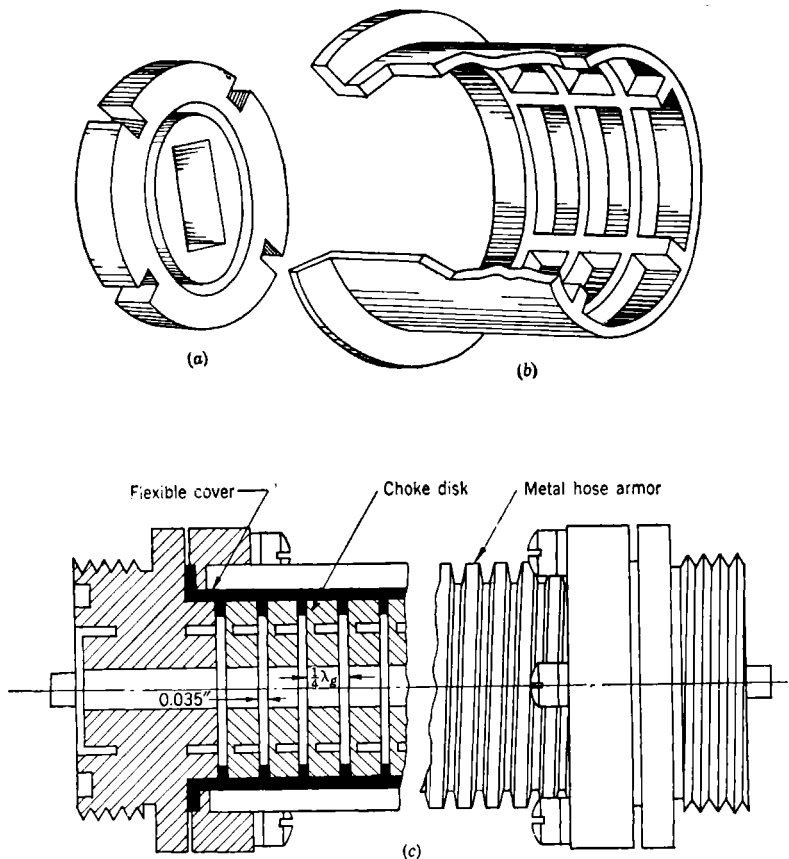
1-cm vertebral assembly; (a) choke disk, (b) flexible cover, (c) assembly.
